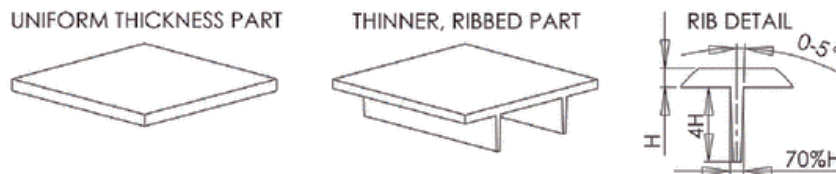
Comparison of a uniform thicker part to the thinner and ribbed design [6]
